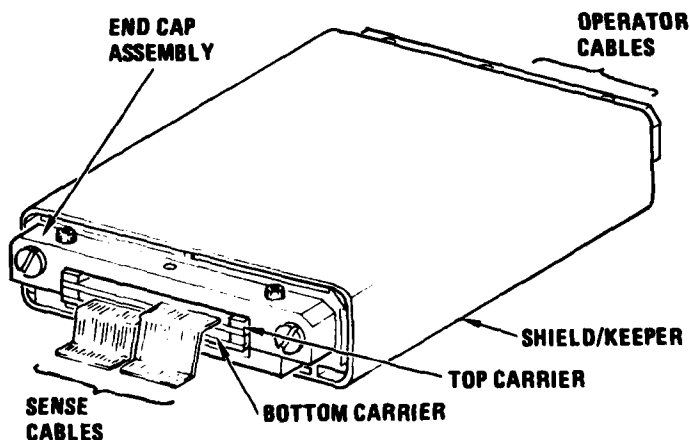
$8 \times 10^5$  bit cell assembly.
